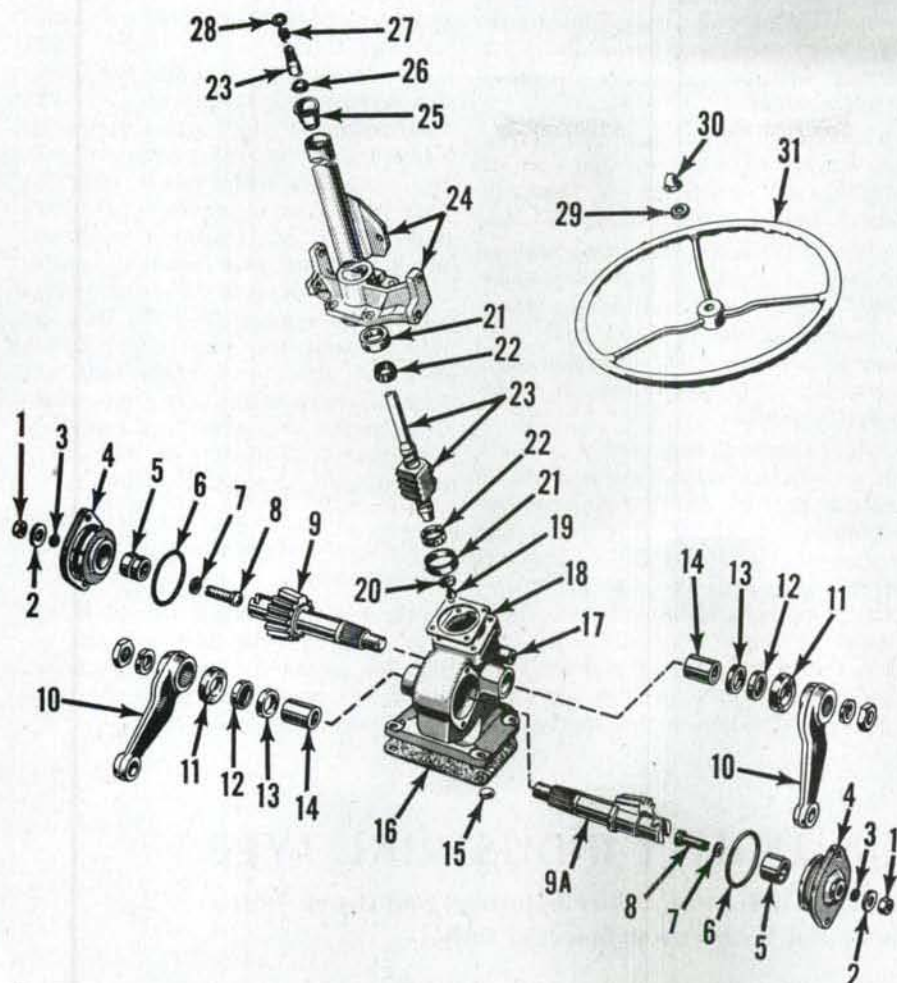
Exploded view of manual steering gear assembly used on All-Purpose and LCG tractors. Wormshaft bearing end play is adjusted by varying the thickness of the shim stack (18); shims are available in thicknesses of 0.002, 0.005, 0.010 and 0.030. Sector end play is adjusted with adjusting screws (8). Use thickness of shim (7) that will provide zero to 0.002 clearance of adjusting screw head in slot of sector gear (9 or 9A).
